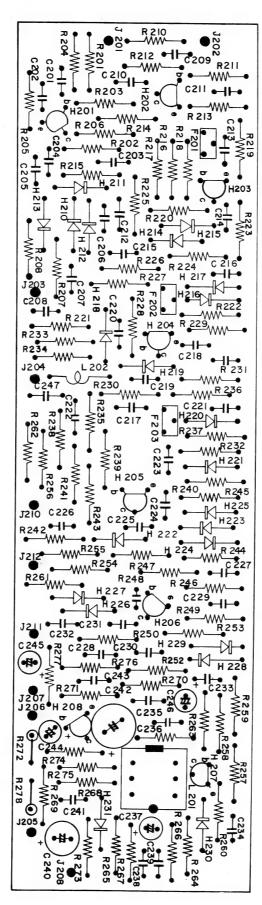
FM IF Amplifier Assembly P200 Component Locations
